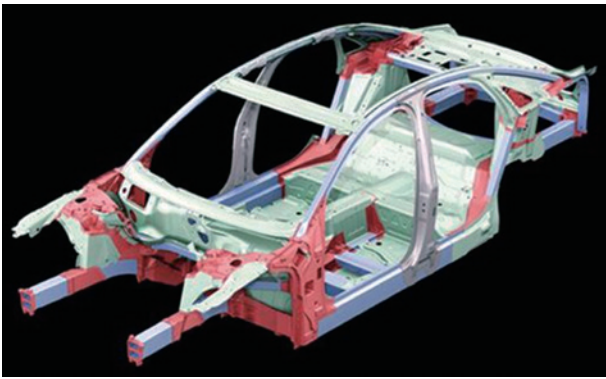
Aluminum space frames structures of AUDI A8⁵⁾.
